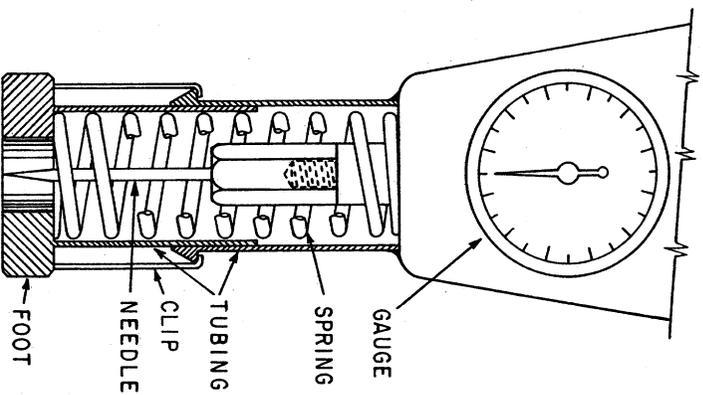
Sectional view of gauge and needle assembly. Spring tension clamps the presser foot against the hide as gauge is pushed downward. Telescoping tubes join the foot and gauge and also guard the needle and spring.
